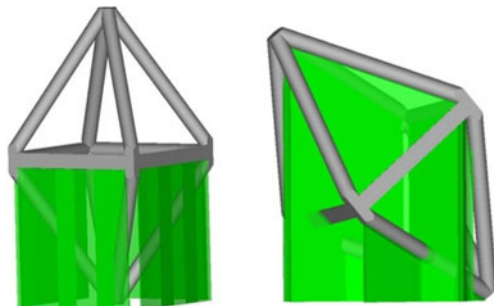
Best (left) and worst (right) building orientation for cell.stl geometry
